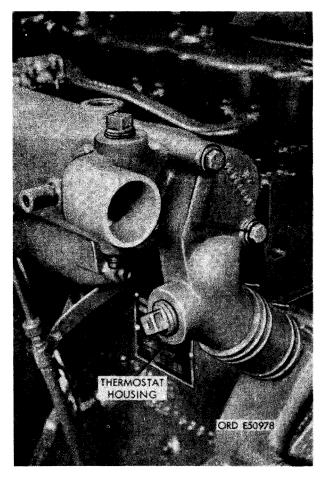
THERMOSTAT HOUSING - INSTALLED VIEW.
